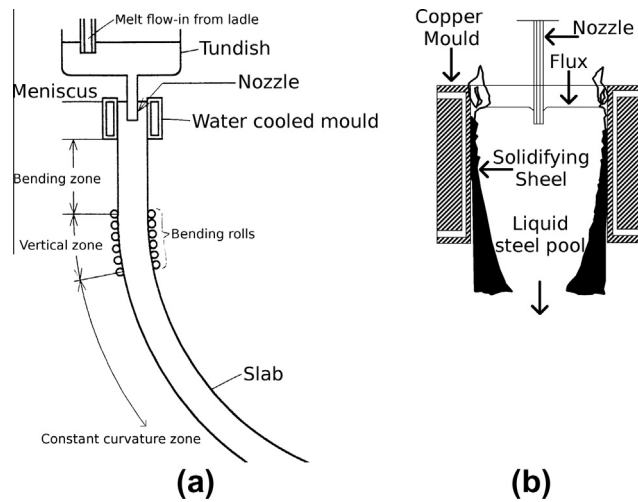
Sketch of continuous casting machine (a) and mould detail (b) [1].
